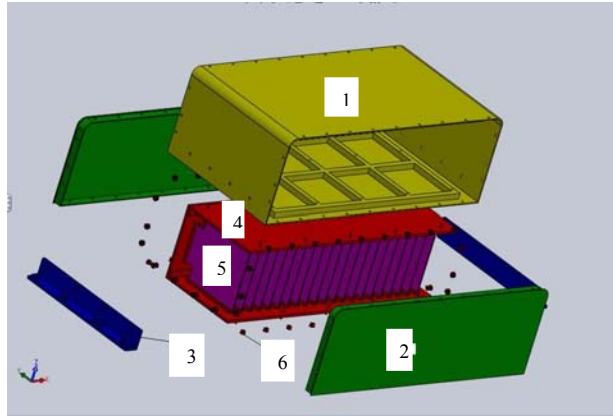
Components for the second proposed electronic housing: 1- upper and lower panels; 2- lateral panel; 3- mounting rails; 4- wedge locks; 5- electronic plates; 6- aluminum rivets;
